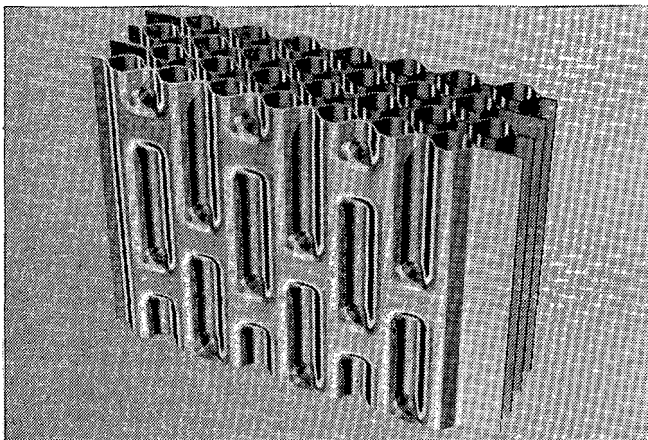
Three dimensional view showing the interconnection of the pseudo tubes formed.
